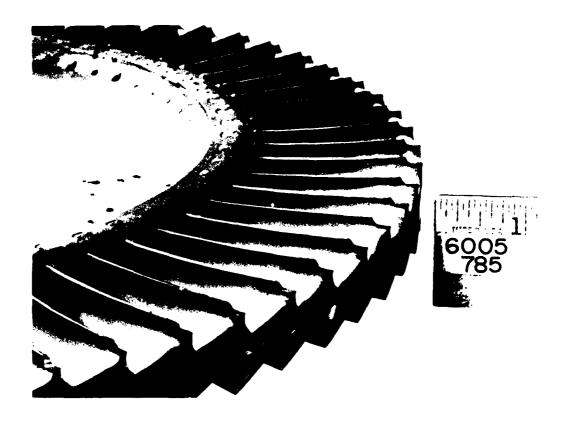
Damage sustained by the power turbine wheel when the No. 4 bearing failed.
